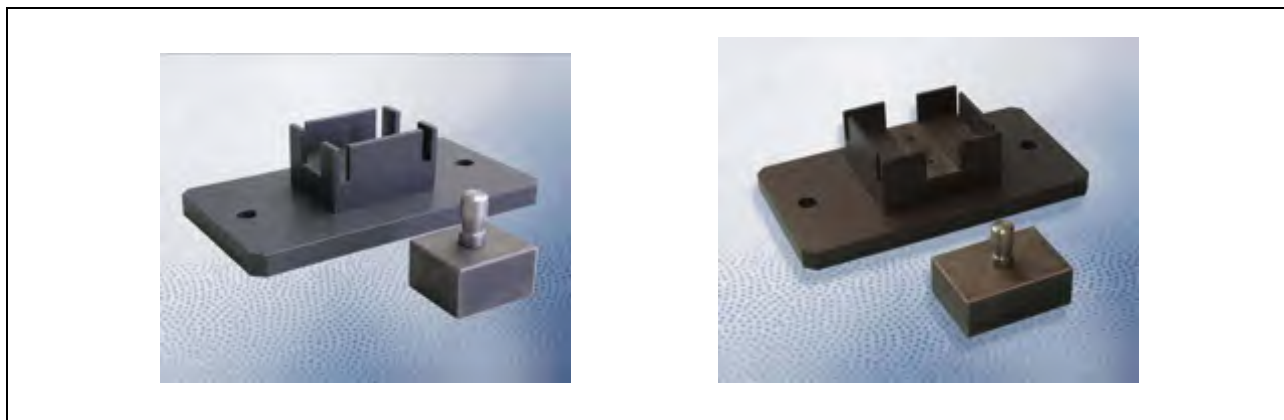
Press-out tools for Easy1B (left illustration) and Easy2B (right illustration) modules
